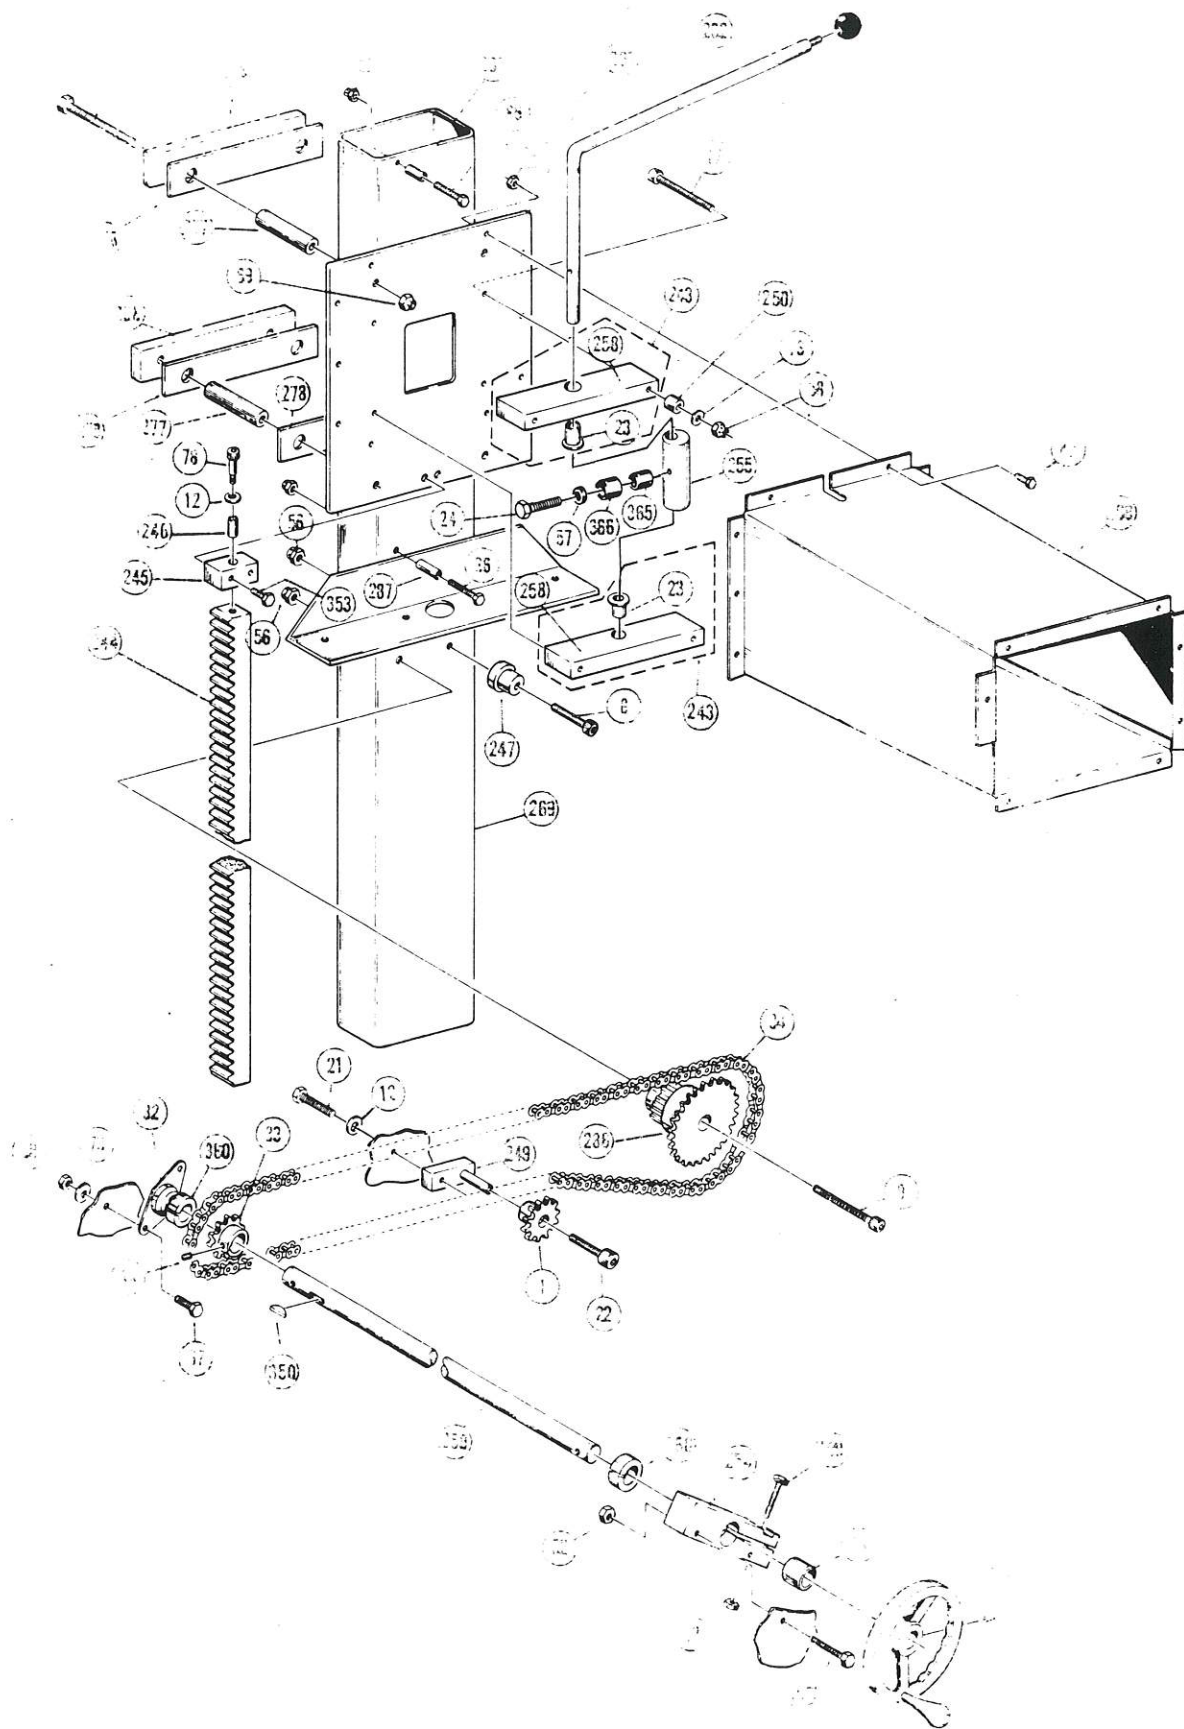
MAST ASSEMBLY AND BOX HEIGHT DRIVE ASSEMBLY
